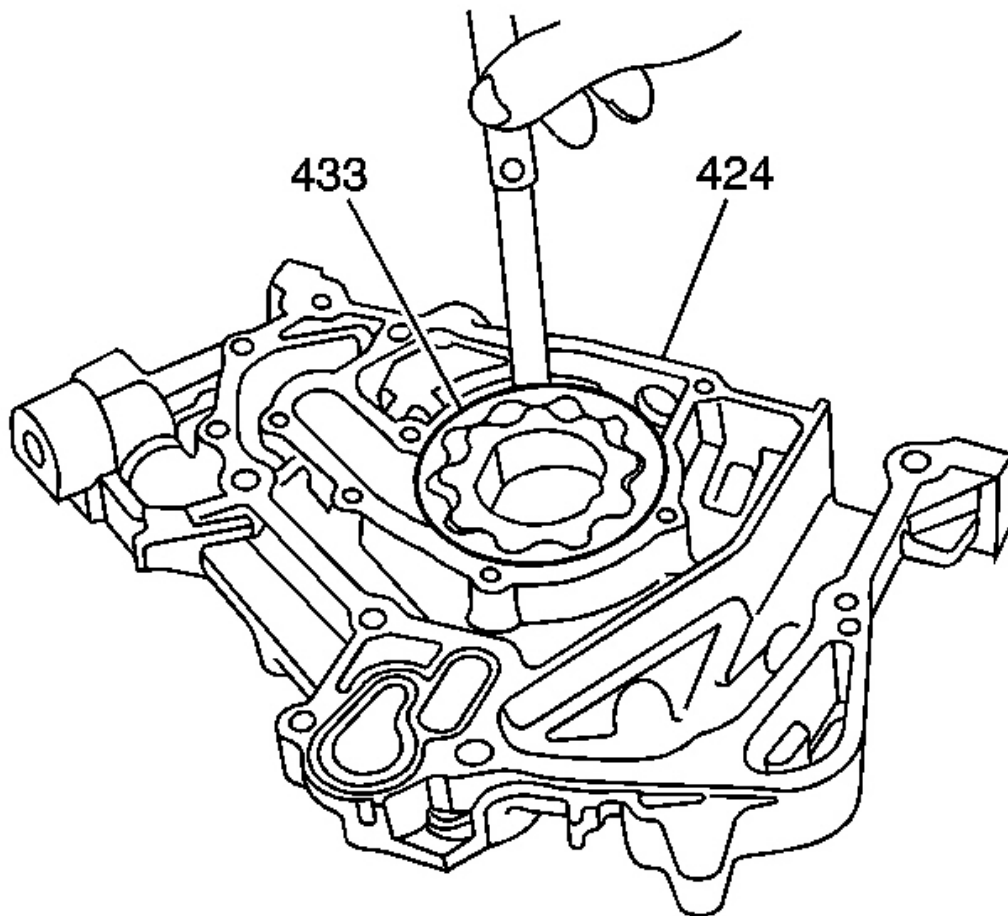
Measuring The Outer Rotor & The Pump Housing Using A Feeler Gage
